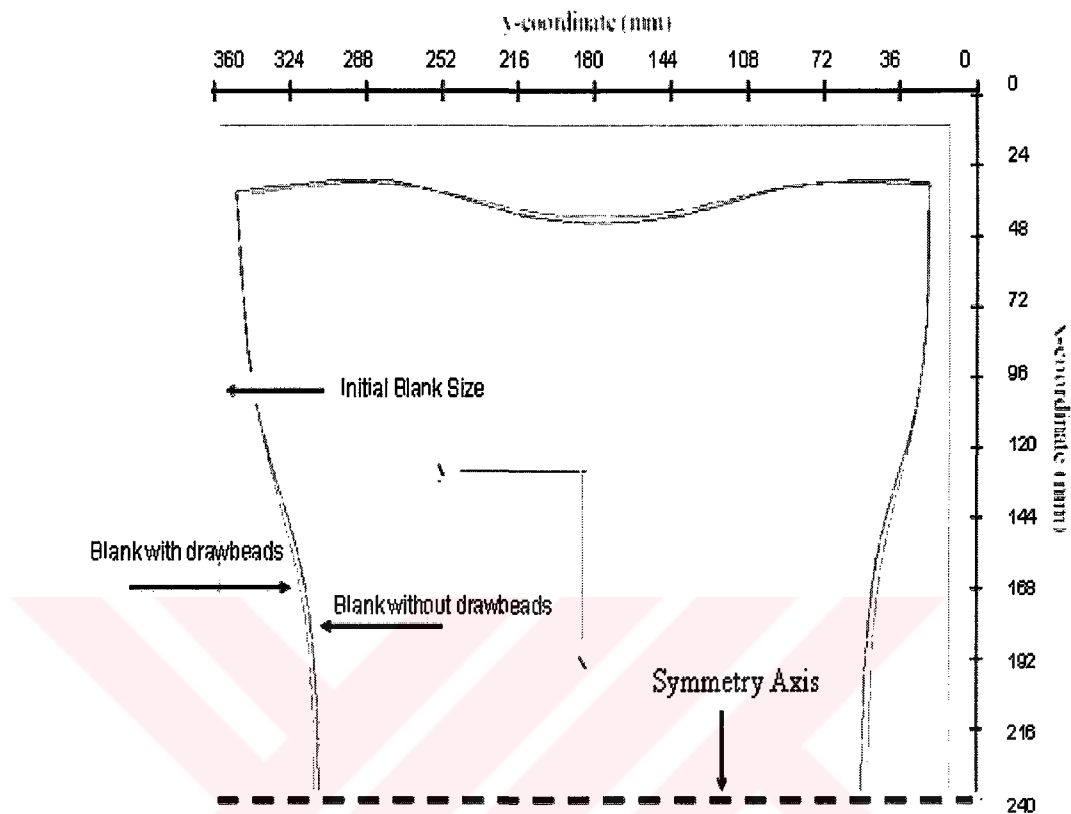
Flange Shape of the Rectangular Product After the Forming
